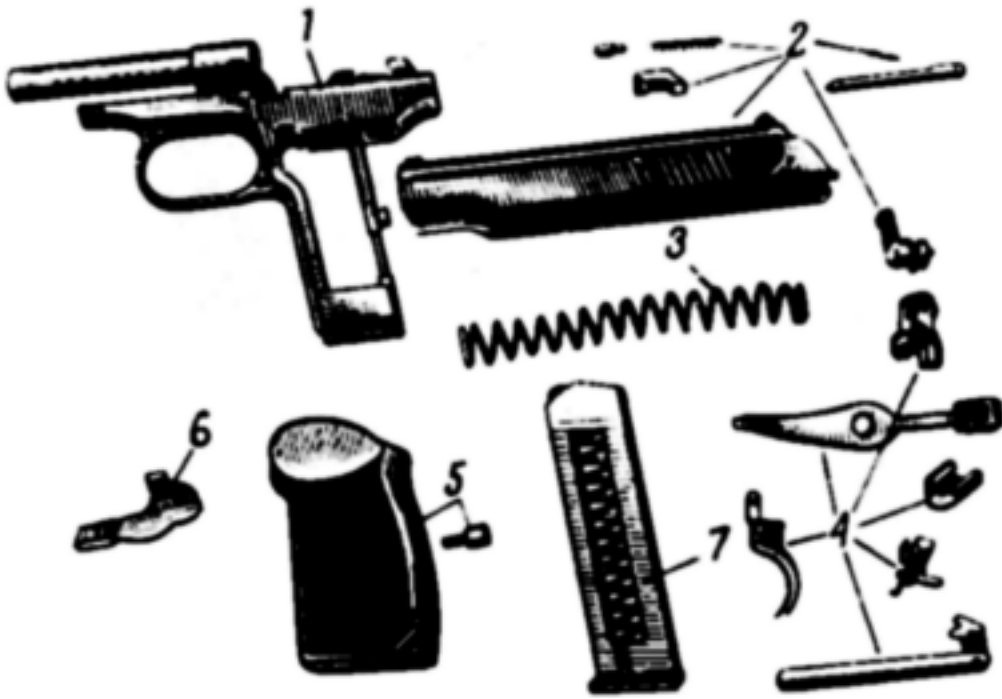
Main parts and mechanisms. 1 - receiver, barrel and trigger guard assembly, 2 - slide, firing pin, extractor and safety lock, 3 - recoil spring, 4 - firing mechanism component parts, 5 - grip stocks and retaining screw, 6 - slide stop, 7 - magazine
